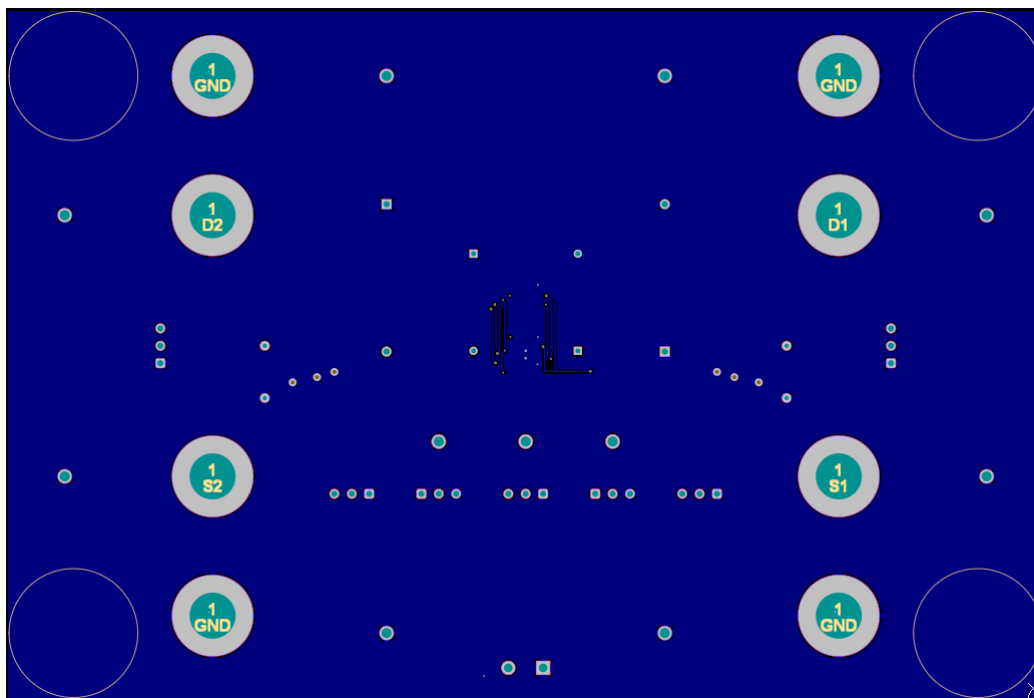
TMUX48XXDSGDDF-EVM Bottom Layer Layout
